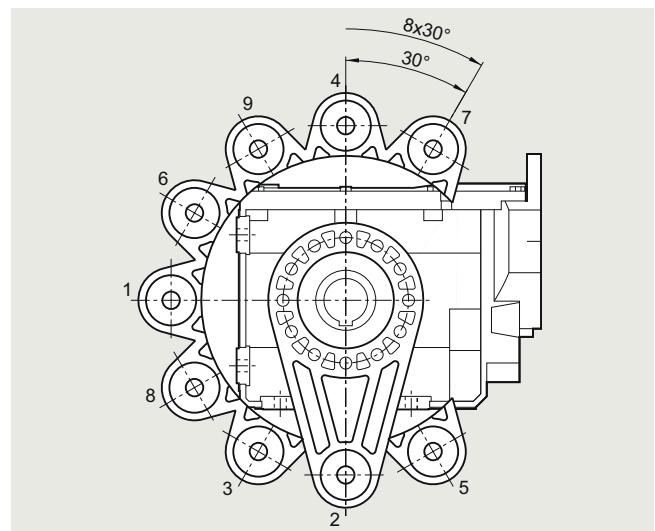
/8 Bevel gearboxes BAD., sizes 39 and 49
